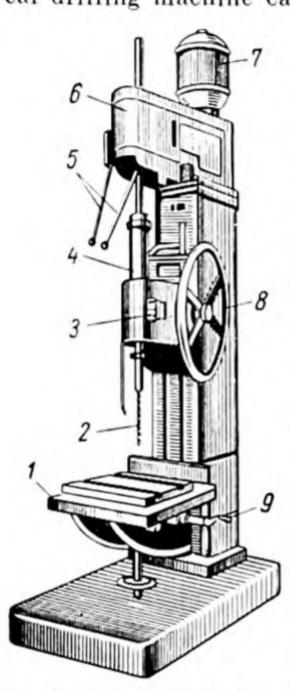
Type 2150 singlespindle, vertical drilling machine:
